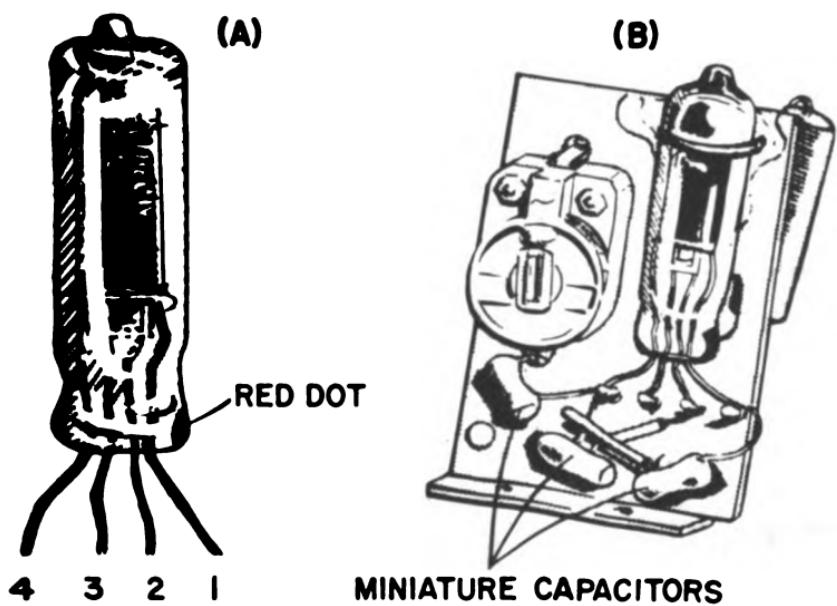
(A) Subminiature tube; (B) component subassembly.
